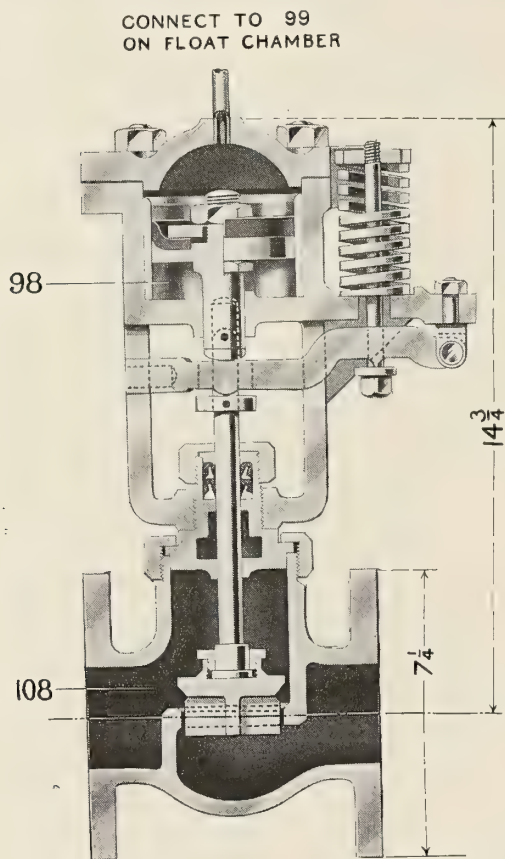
Sectional View of Todd Thermofeed Regulating Valve
